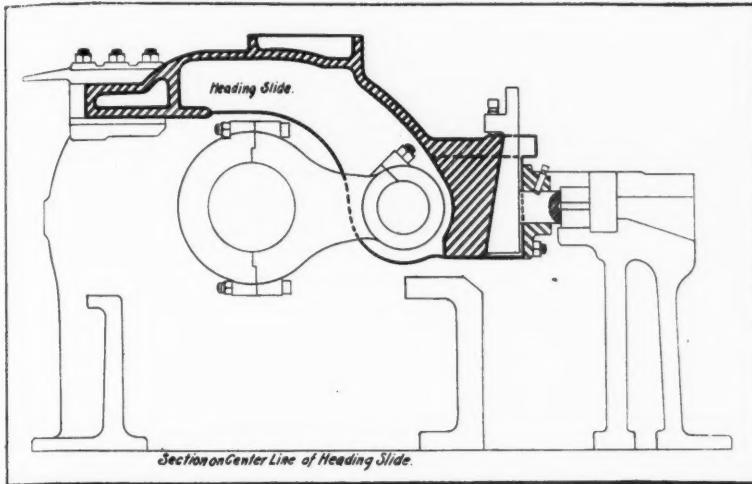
Diagram of the Heading Slide and Bolster Plate Construction of the National Bolt and Rivet Header
